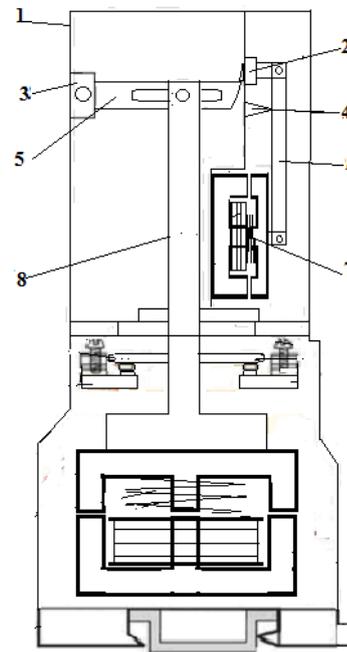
The design of a magnetic starter with an indirect drive mechanism
